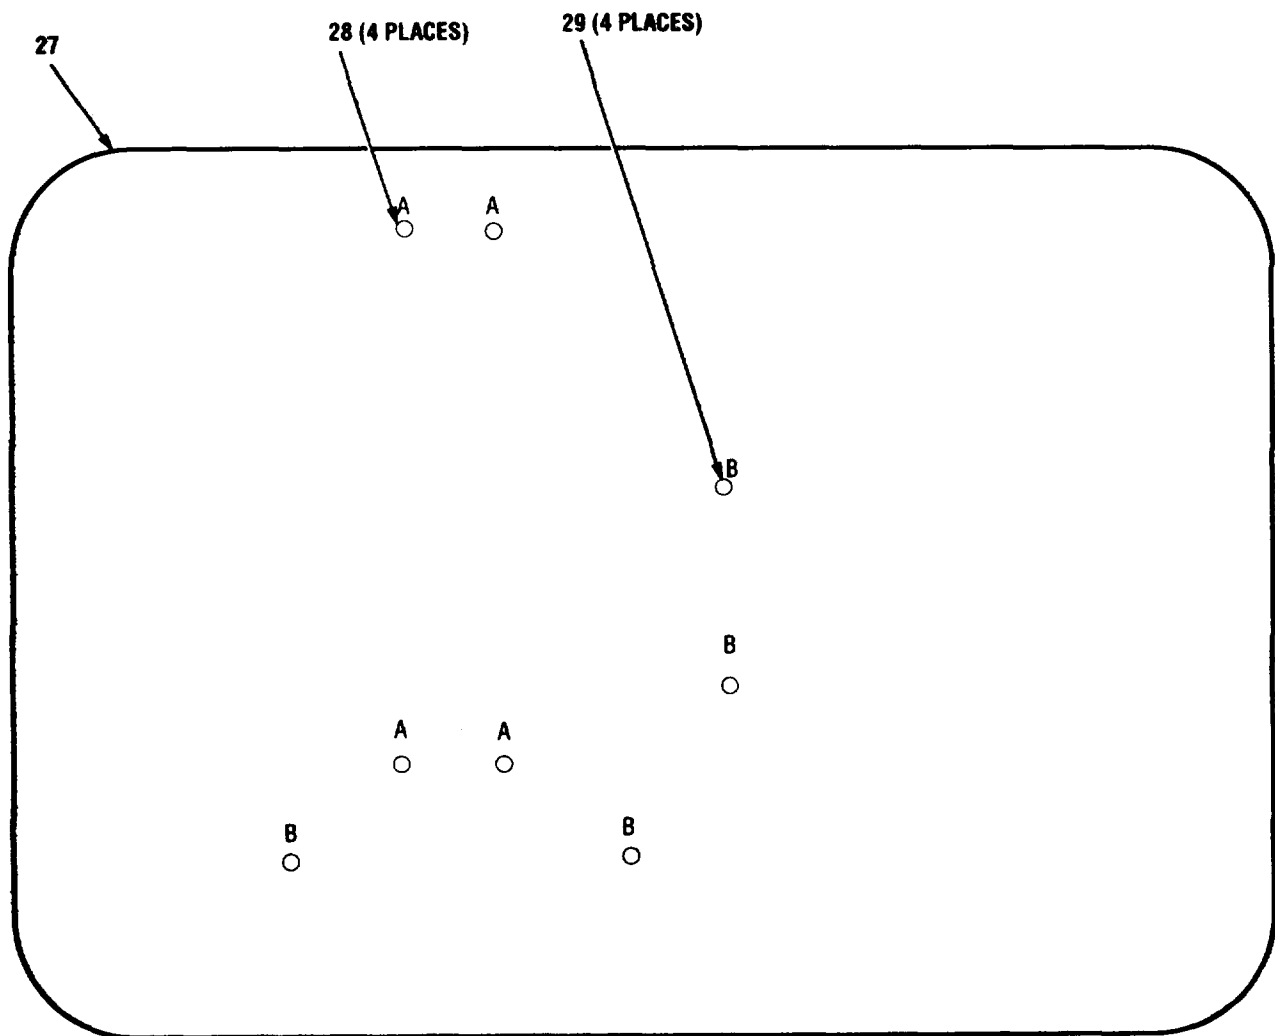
Front Panel Assembly (1-94285.0000//A) (Sheet 1 of 2)
